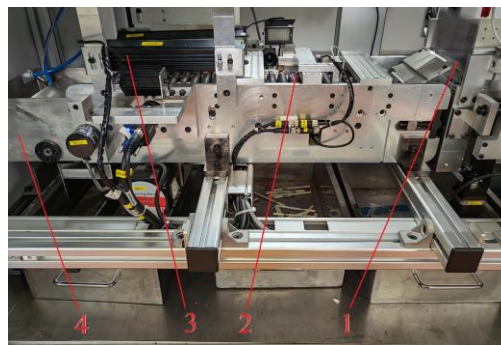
Test machine and test cigarette, 1: a device for forming units; 2: full appearance imaging device; 3: assembly of camera and light; 4: sorting device.
